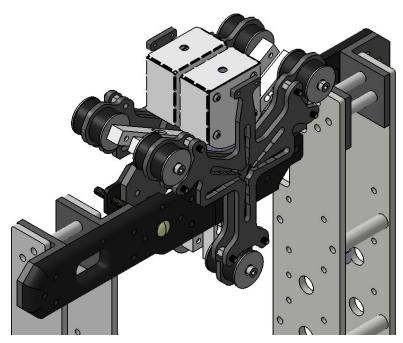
Motors offset from supports for coaxial back-to-back with the special mount. [100, 188] mm.
